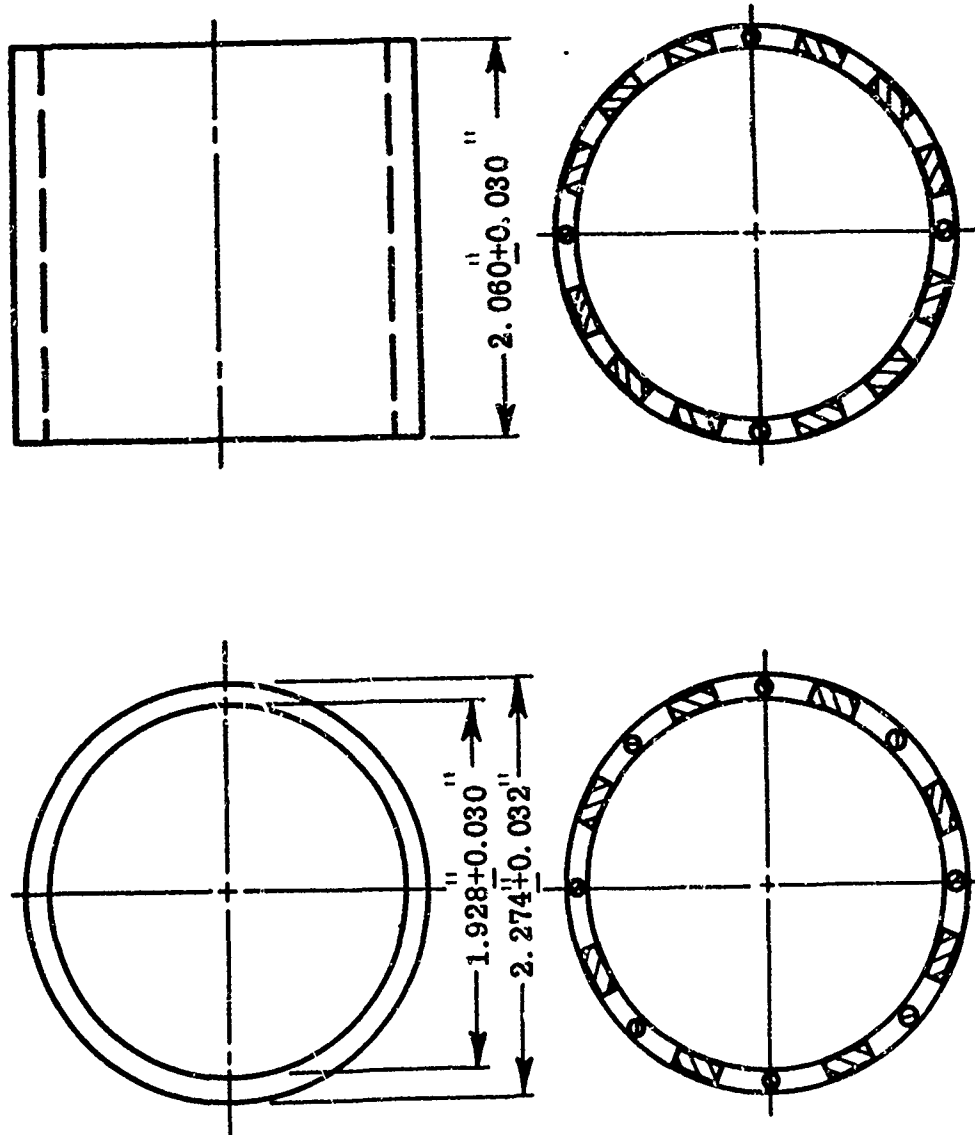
Configuration of Specimen Blank 1831-A-14 as received from Coors and Cutting Plan for Removing Phase I Macro Tensile and Macro Flexural Specimens
